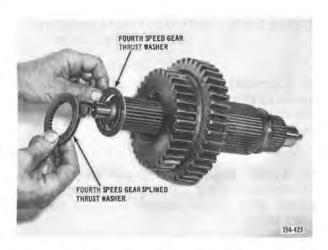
Installing Fourth Speed Gear Thrust Washer and Splined Thrust Washer
